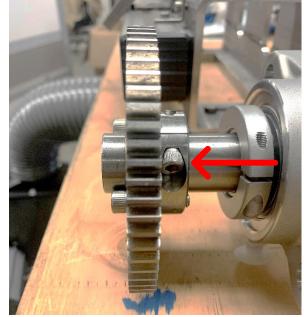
Bolt on gear shaft collar that needs to be adjusted
